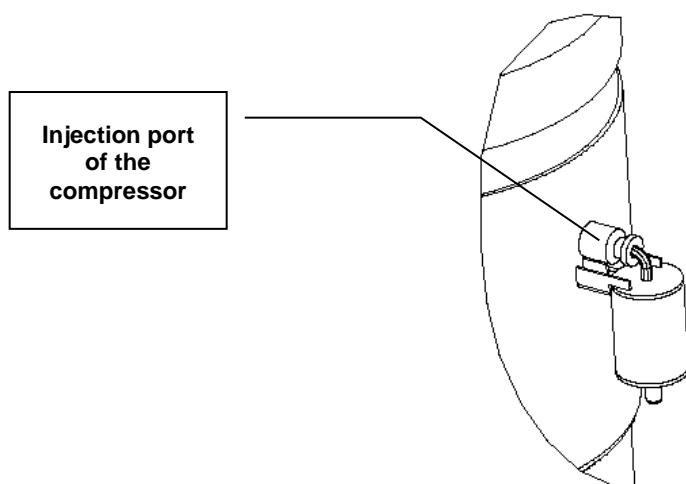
Capillary tube assembly brazed into the injection port of the compressor
